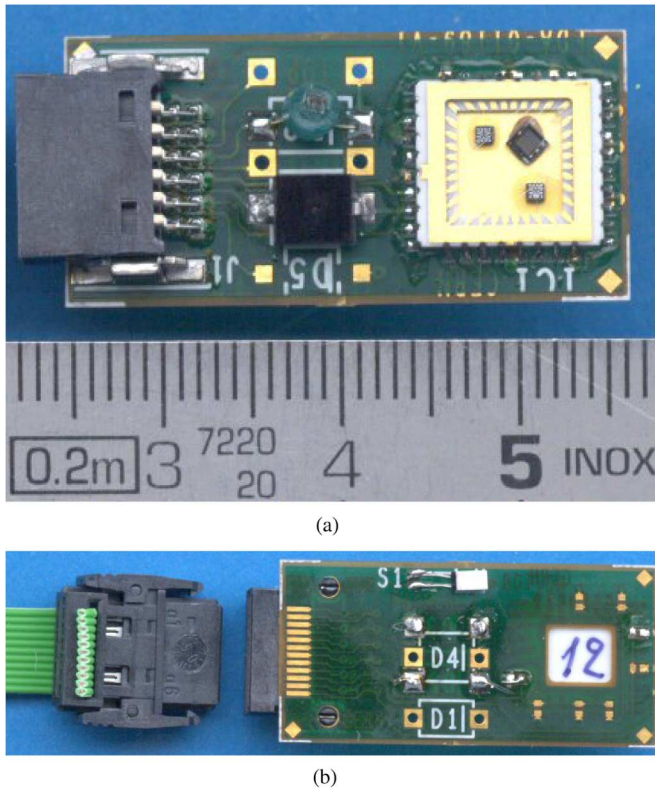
Integrated sensor carrier for the LHC Experiments. (a) PCB Front-side with 2 *p-i-n* diodes and 3 RadFET dies on board, (b) PCB Back-side with external cabling.
